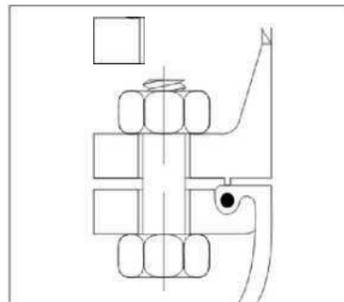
Do not use flange with tongue or groove which will damage the rubber.
